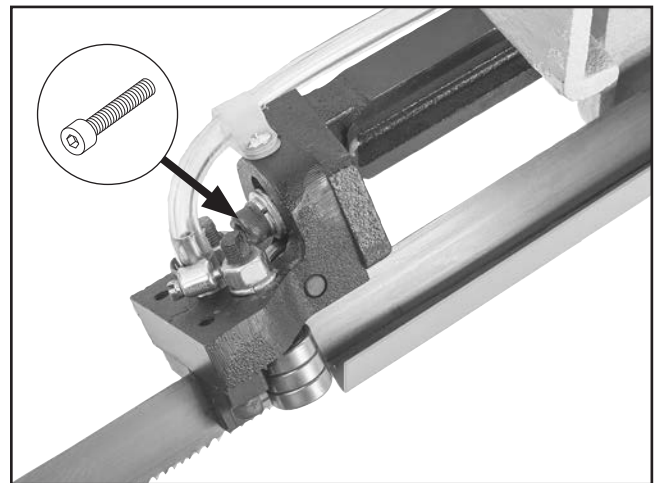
Location of adjustment cap screw (upper blade guide assembly shown).
